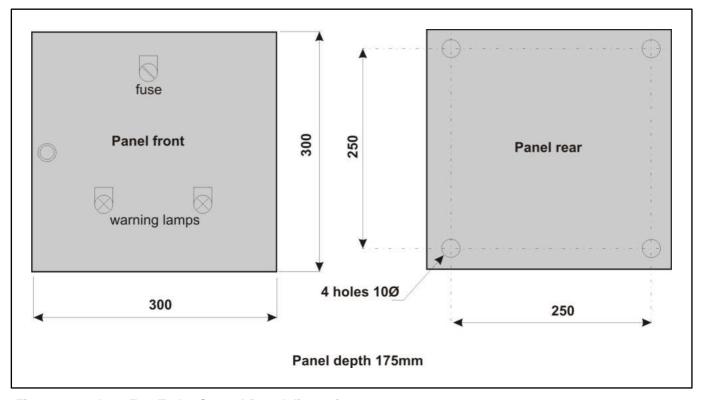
Arne Eco Turbo Control Panel dimensions
